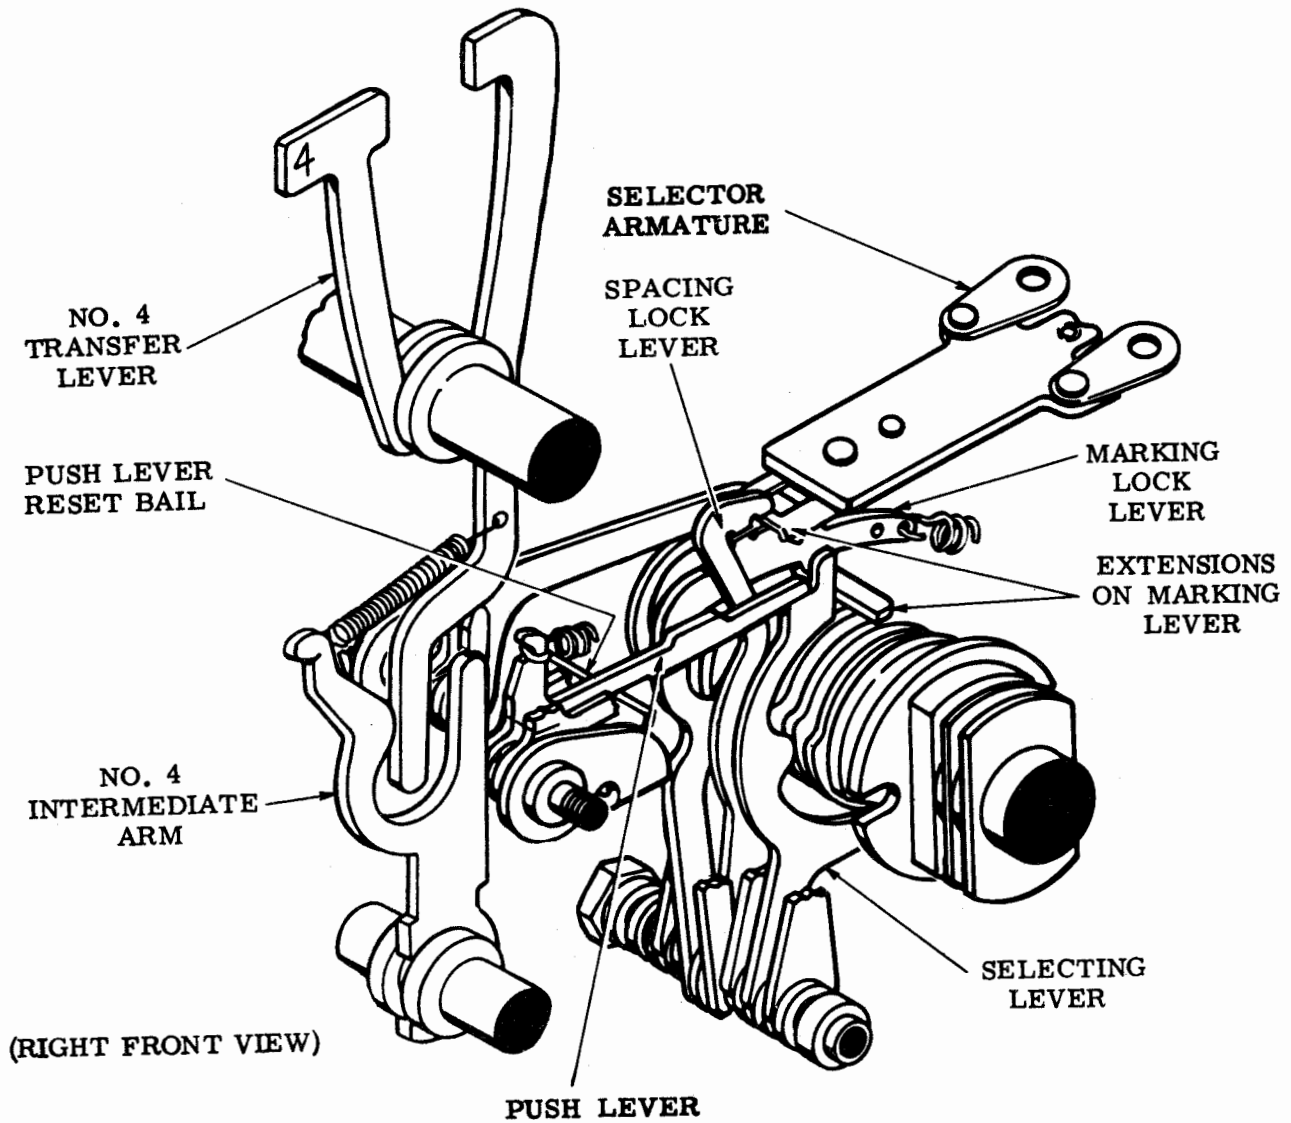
Selecting Mechanism and Transfer Mechanism
